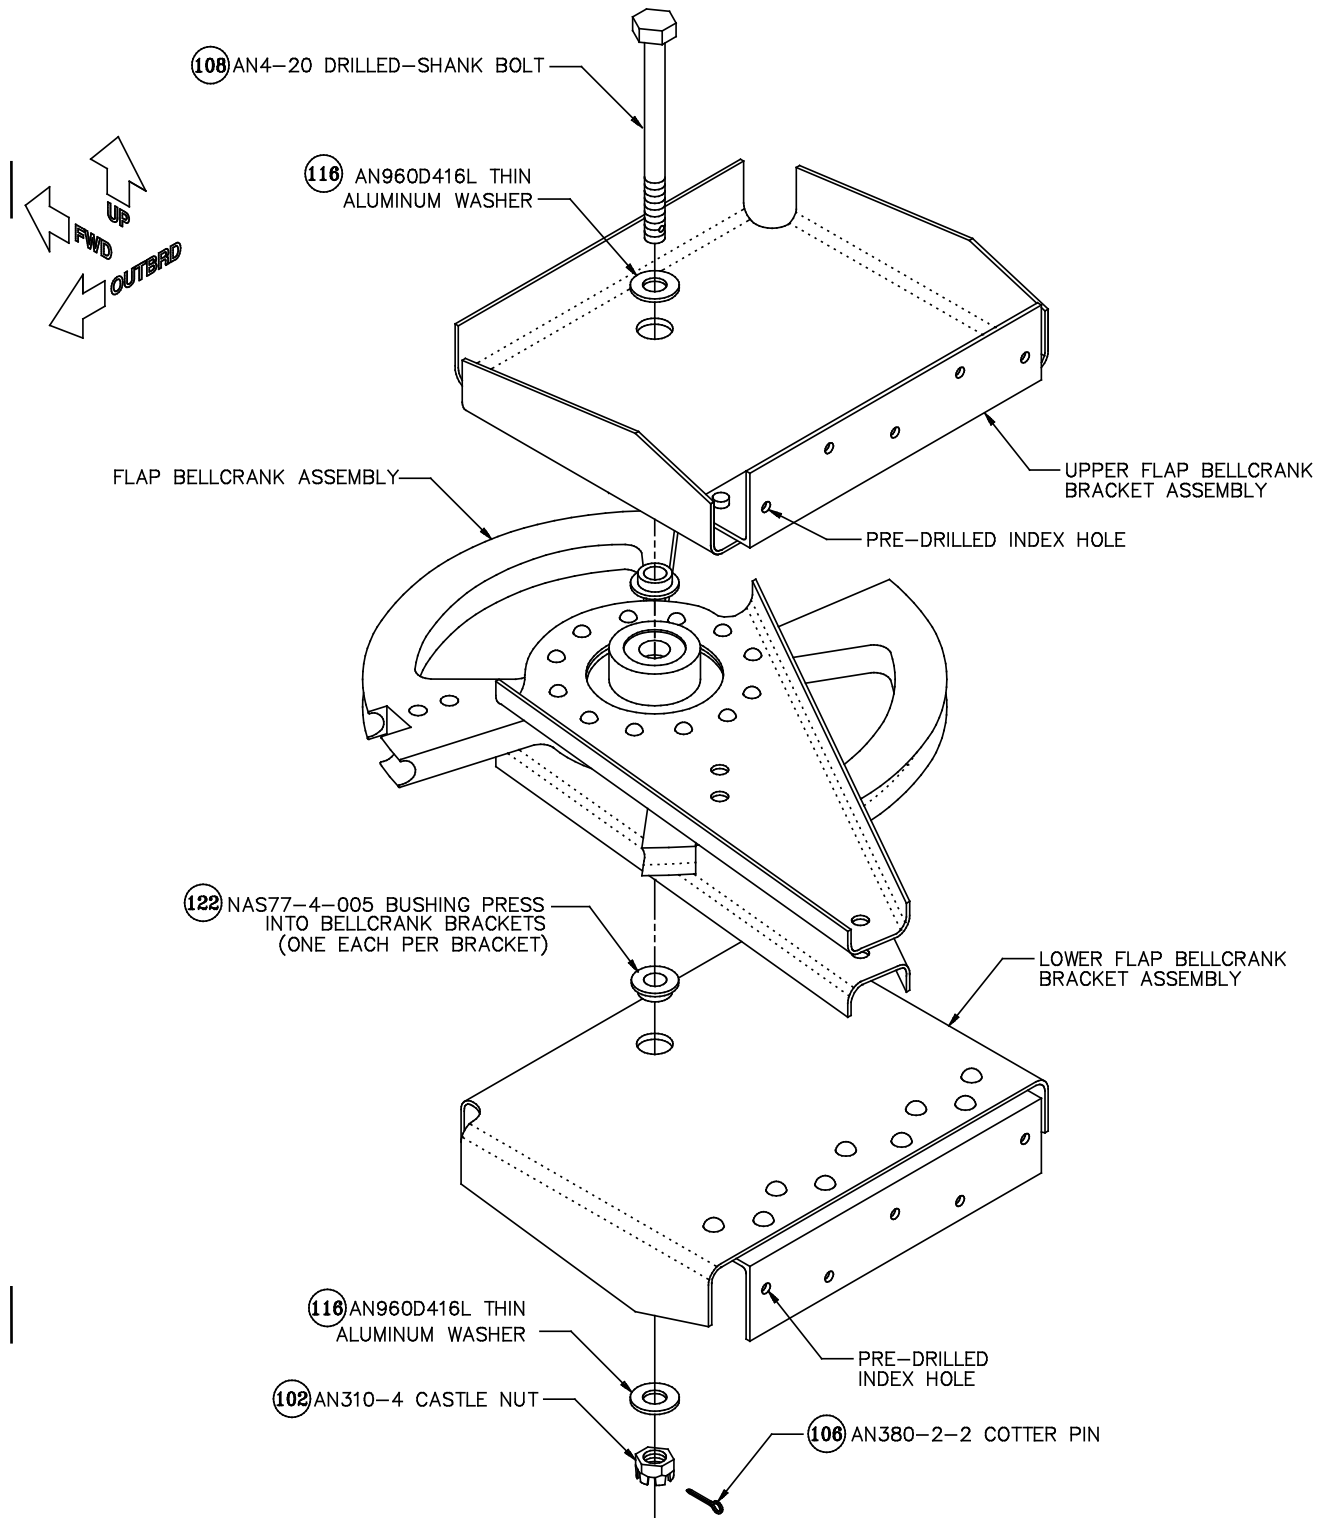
Mounting the Bellcrank Assembly Between the Bellcrank Brackets
